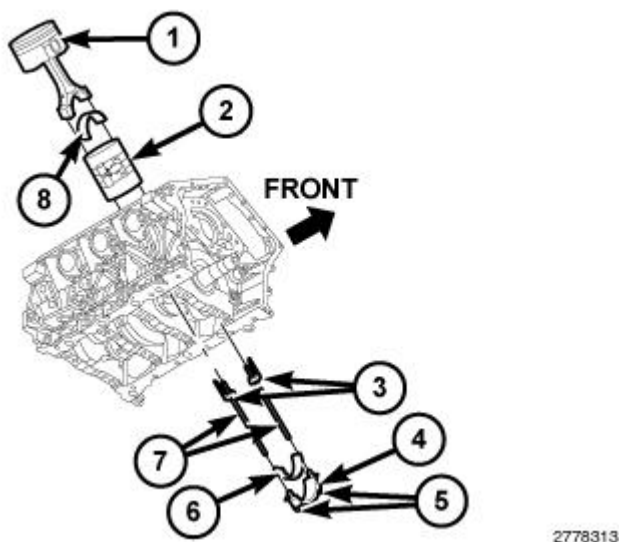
Piston, Connecting Rod Cap, Bolts, Plastic Guide Plates & Guide Pins
